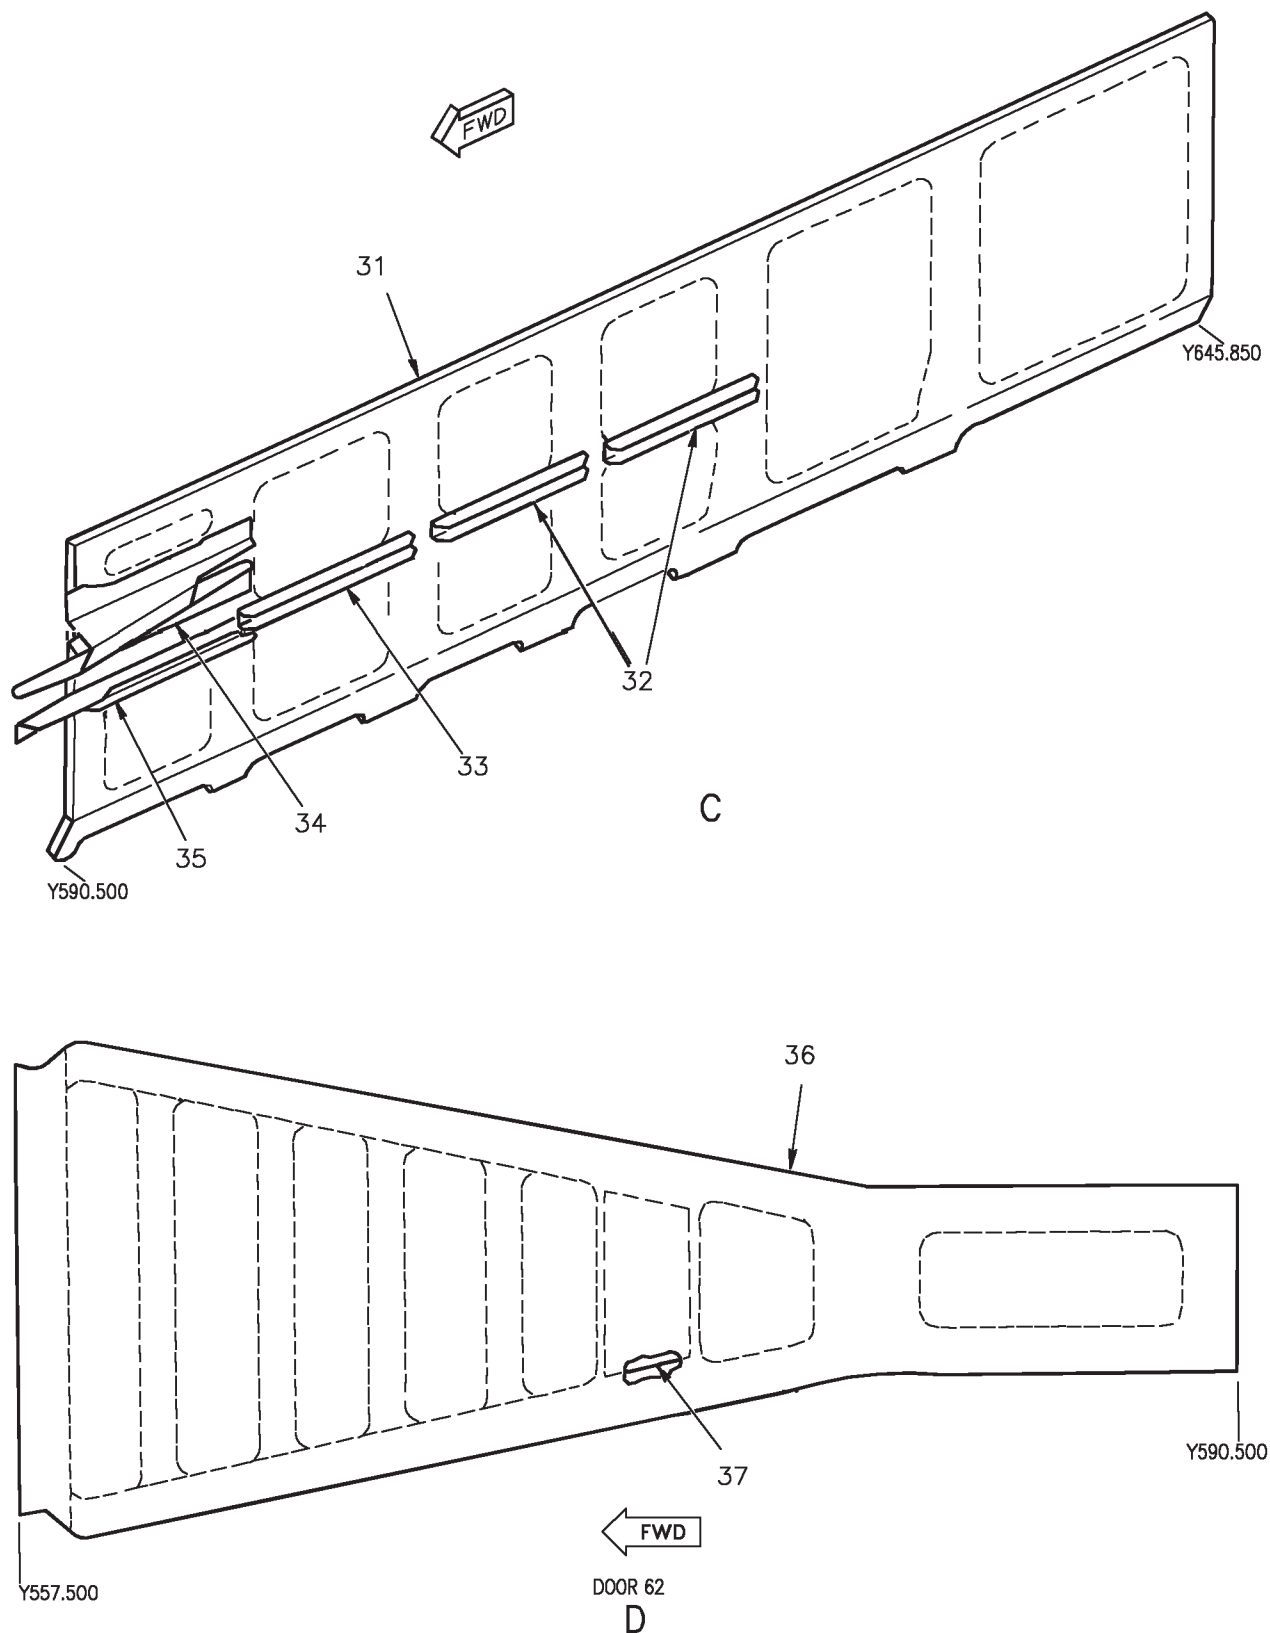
Aft Fuselage Corrosion Prone Areas (Sheet 4)
